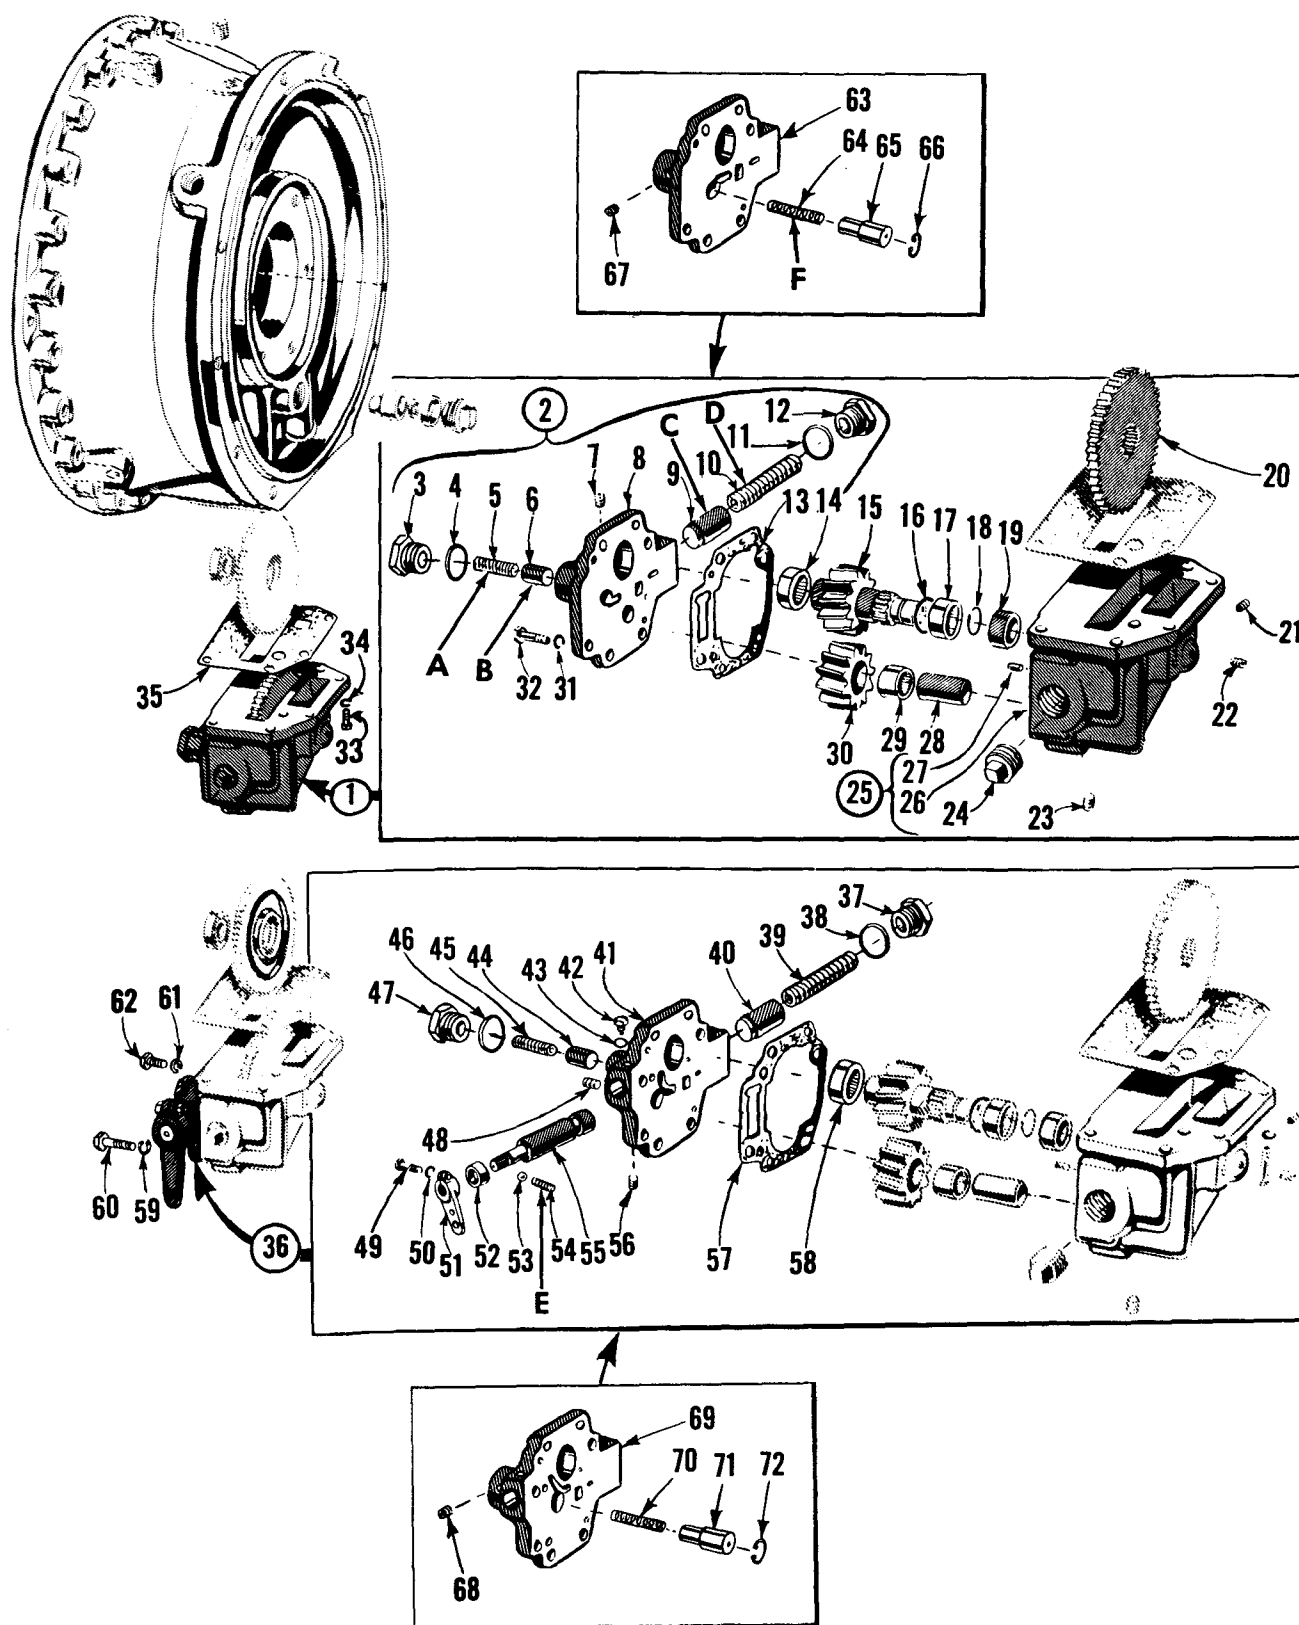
Torqmatic converter charging oil pump — exploded view
